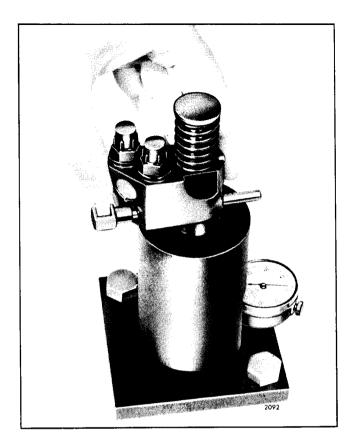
Checking Injector Spray Tip Concentricity with Tool J 5119
